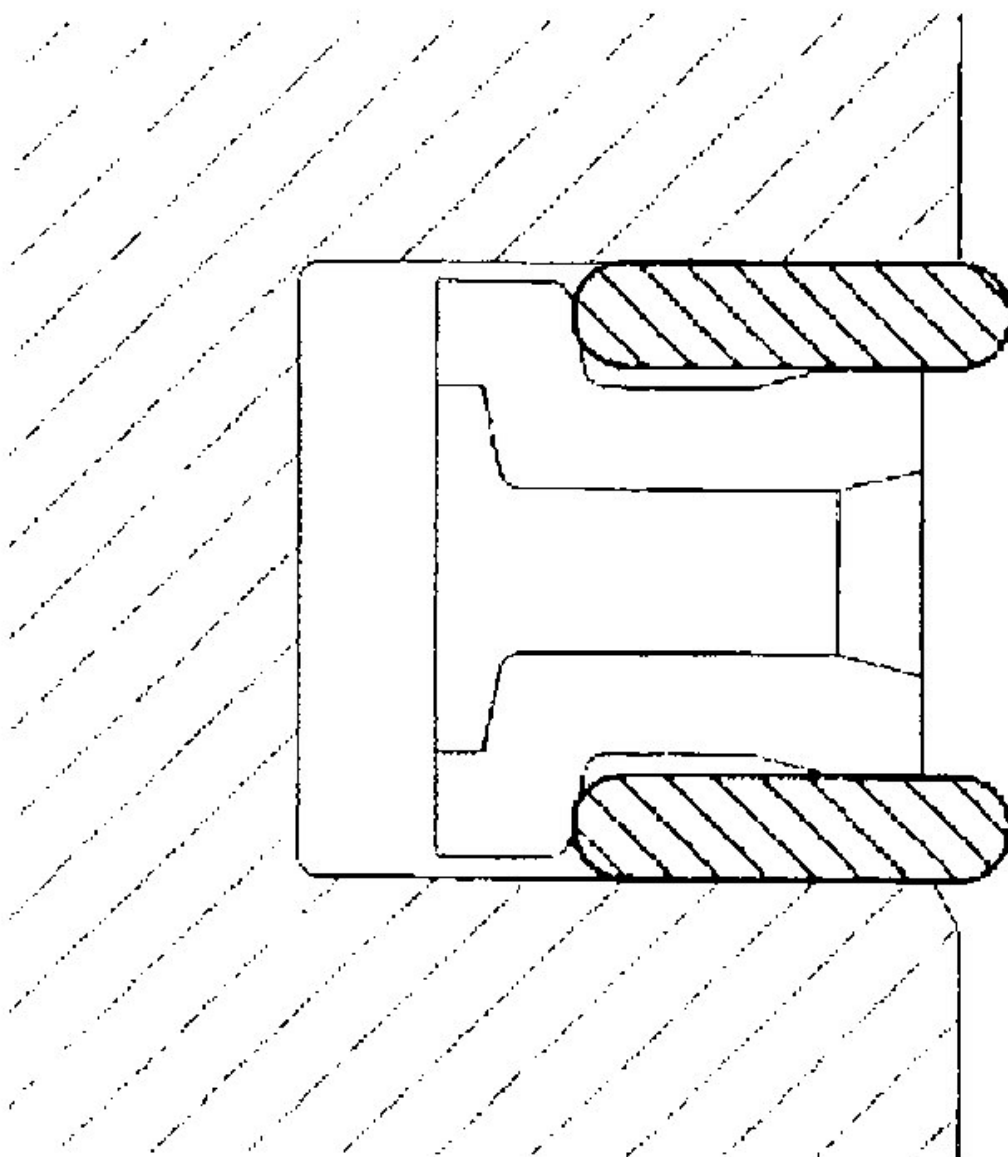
Fitting Oil Ring Spacer Into Piston Ring Groove
